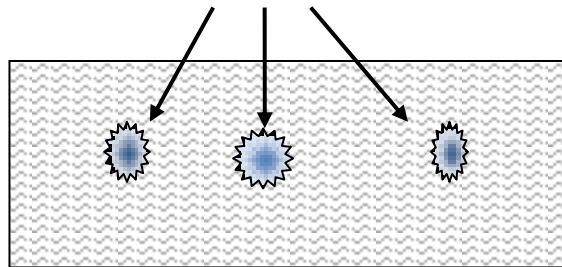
Standard Twist Drill Should Not Be Used To Drill Holes In Sheet Metal
